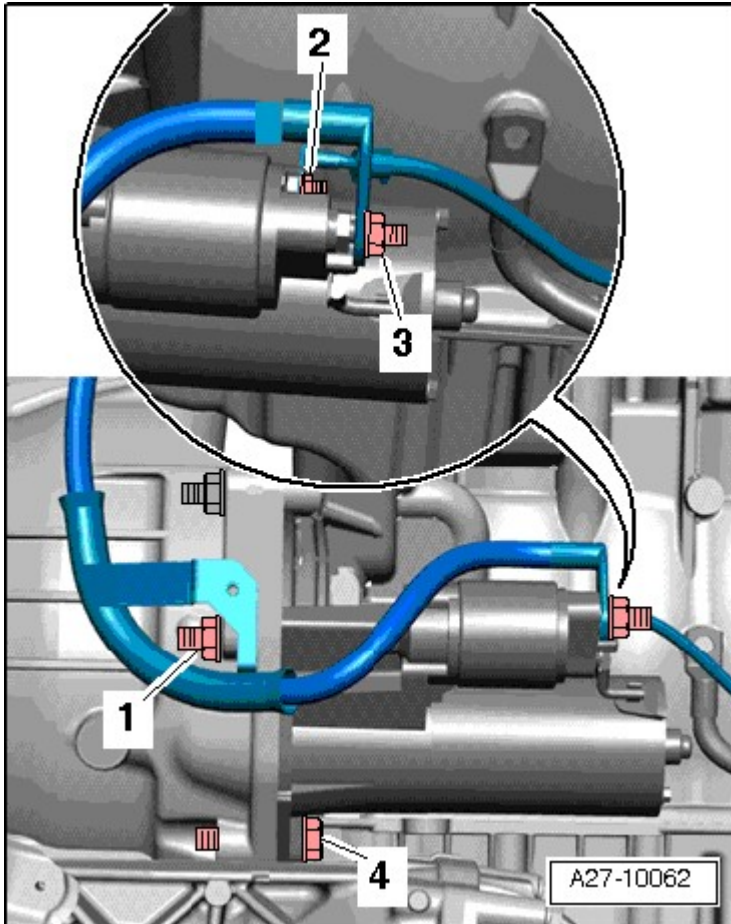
Identifying Bolts -1 & 4- And Wire Brackets -2 & 3-
